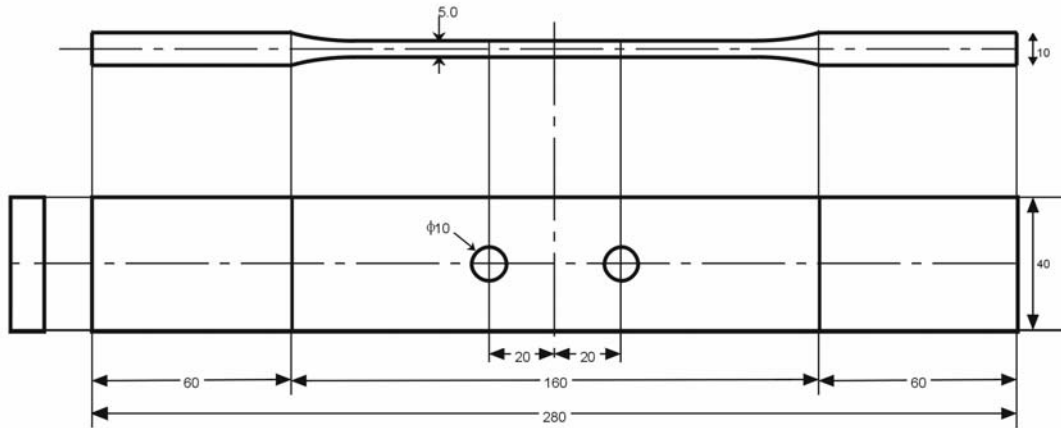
Bolthole coupon, made of D6ac steel and featuring two boltholes of typical F-111 dimensions. The boltholes had fatigue cracks grown in them using representative F-111 flight spectrum loading.
